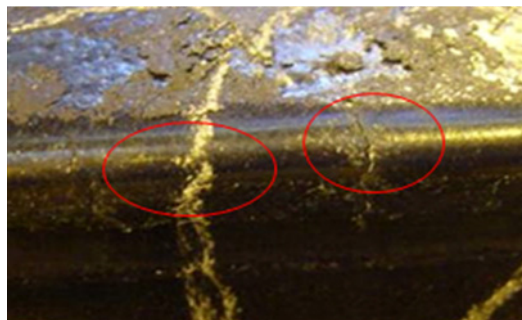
Transverse Corner Cracks from Continuously Cast Steel Slab
